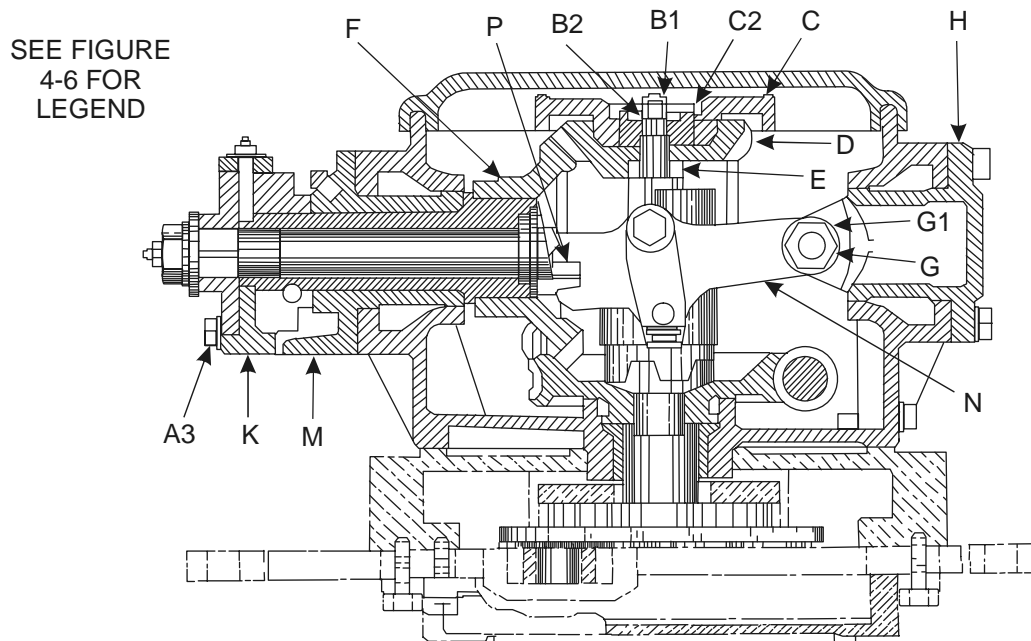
Sectional View of M-23 Gearbox – From Motor End (Right-Hand Assembly)
